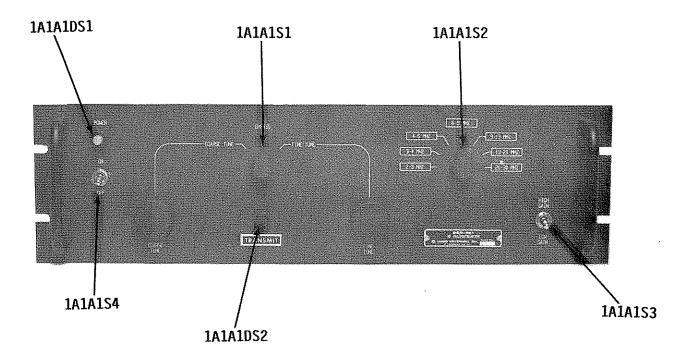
SHEET 9 of 19, RELAY/ALC ASSEMBLY, DISASSEMBLY
